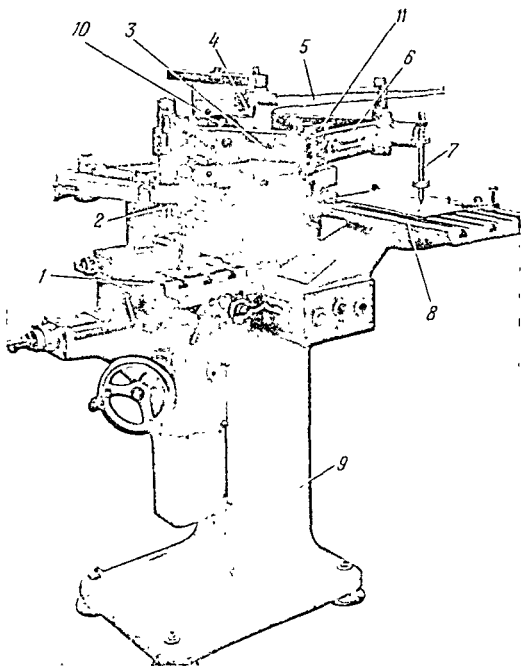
Pantograph tracer controlled milling machine, model 6T403
